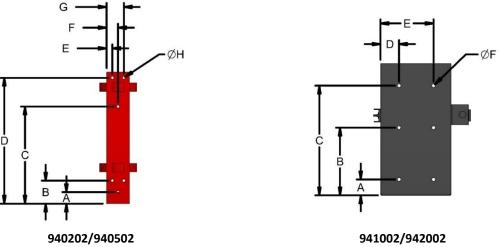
Cylinder Mounting Bracket Bolt Pattern
